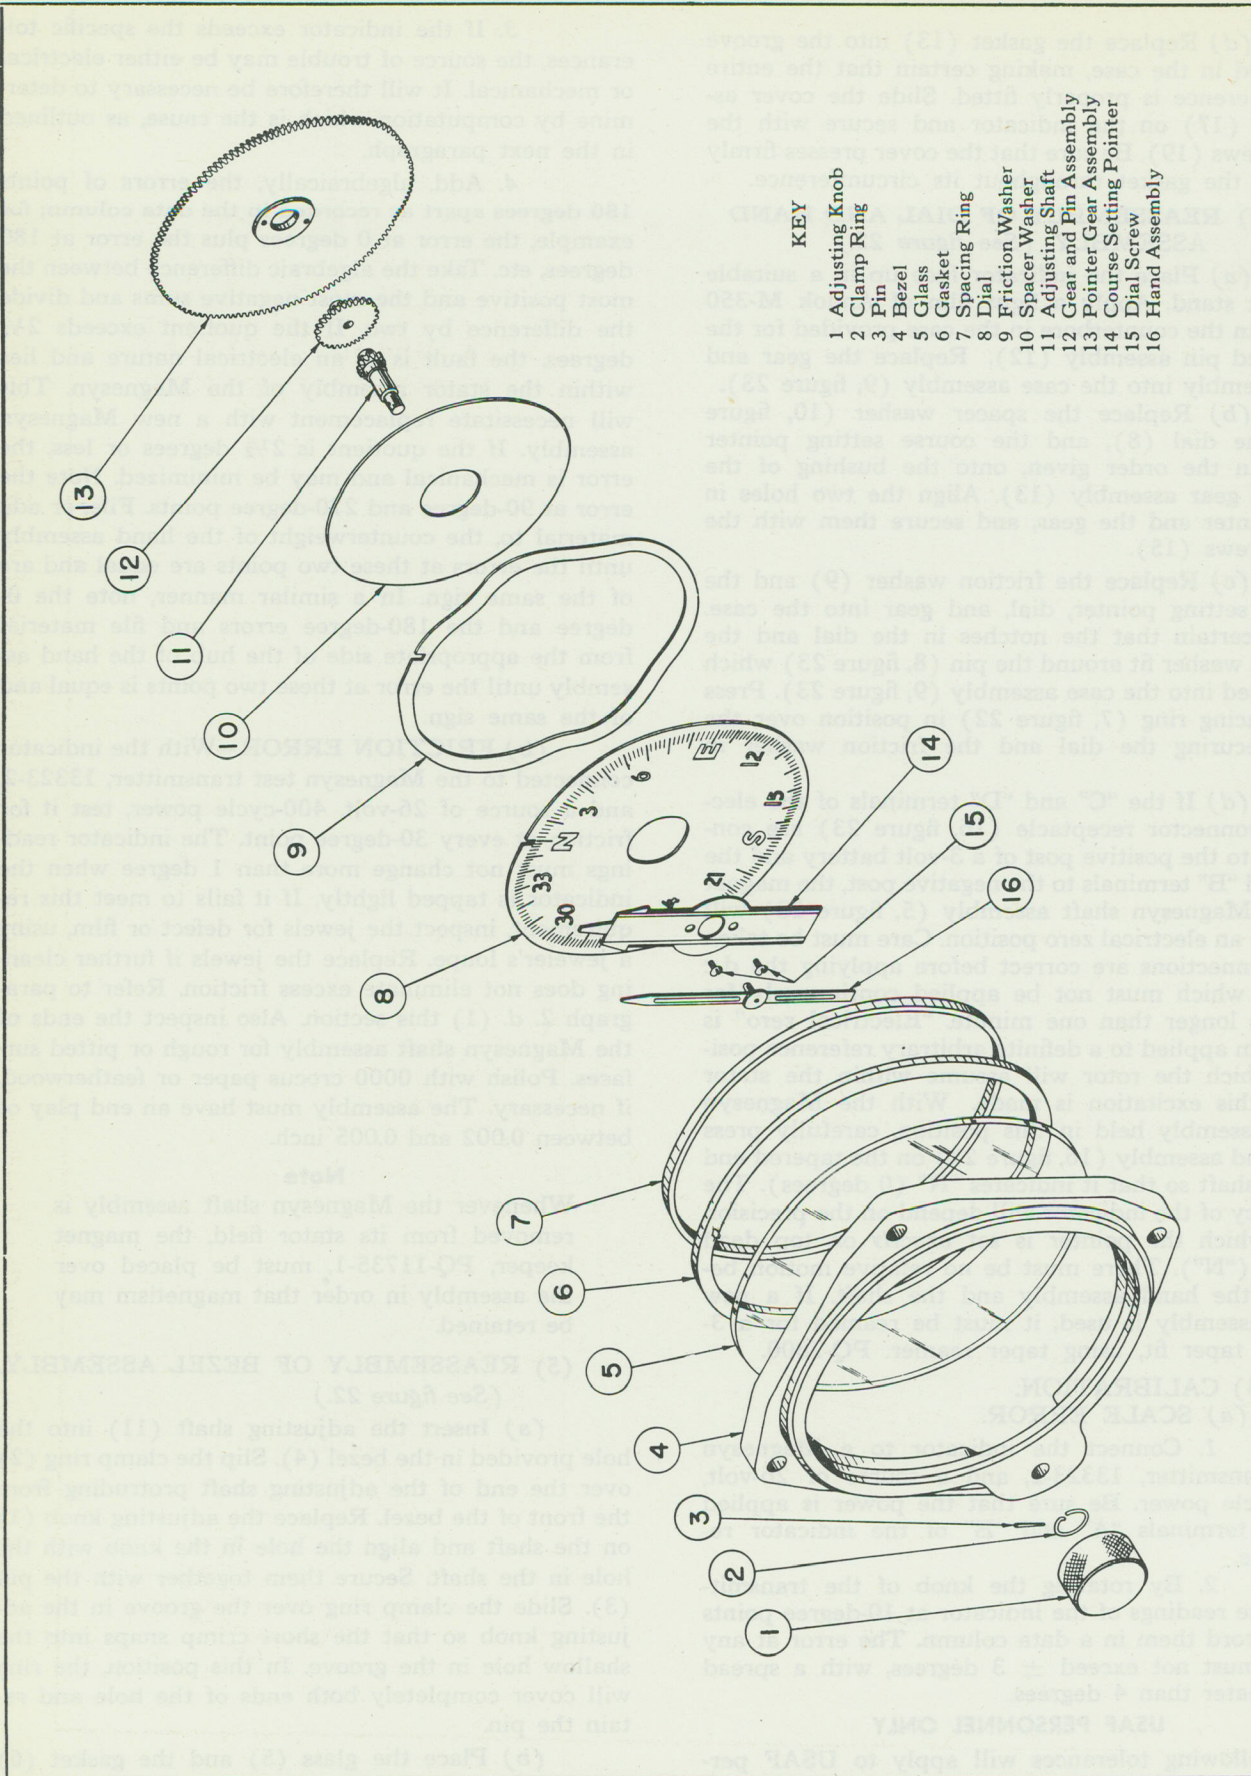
Exploded View Drawing—Main Assembly—Indicator—Types AN 5730-2 and AN 5730-6 (Pioneer Types 10061--A1)
